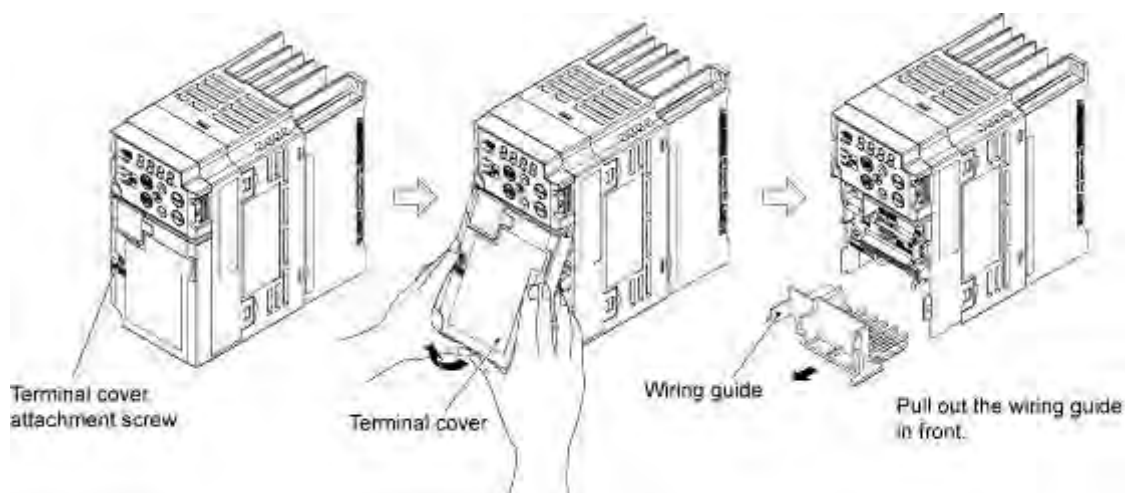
Removal of the Terminal Cover and the Wiring Guide (for VXT-6A-2)
